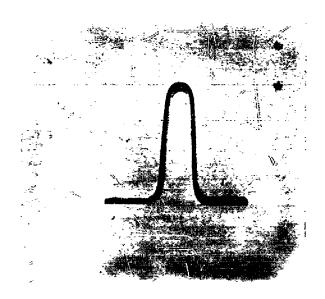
Deformed Specimen Cb-752 Material .018 Gage
